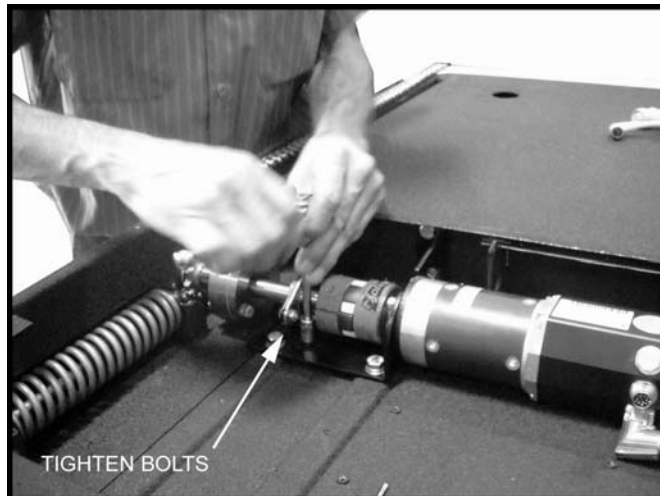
MOTOR DRIVE SYSTEM BOLTS (LH SIDE SHOWN)
